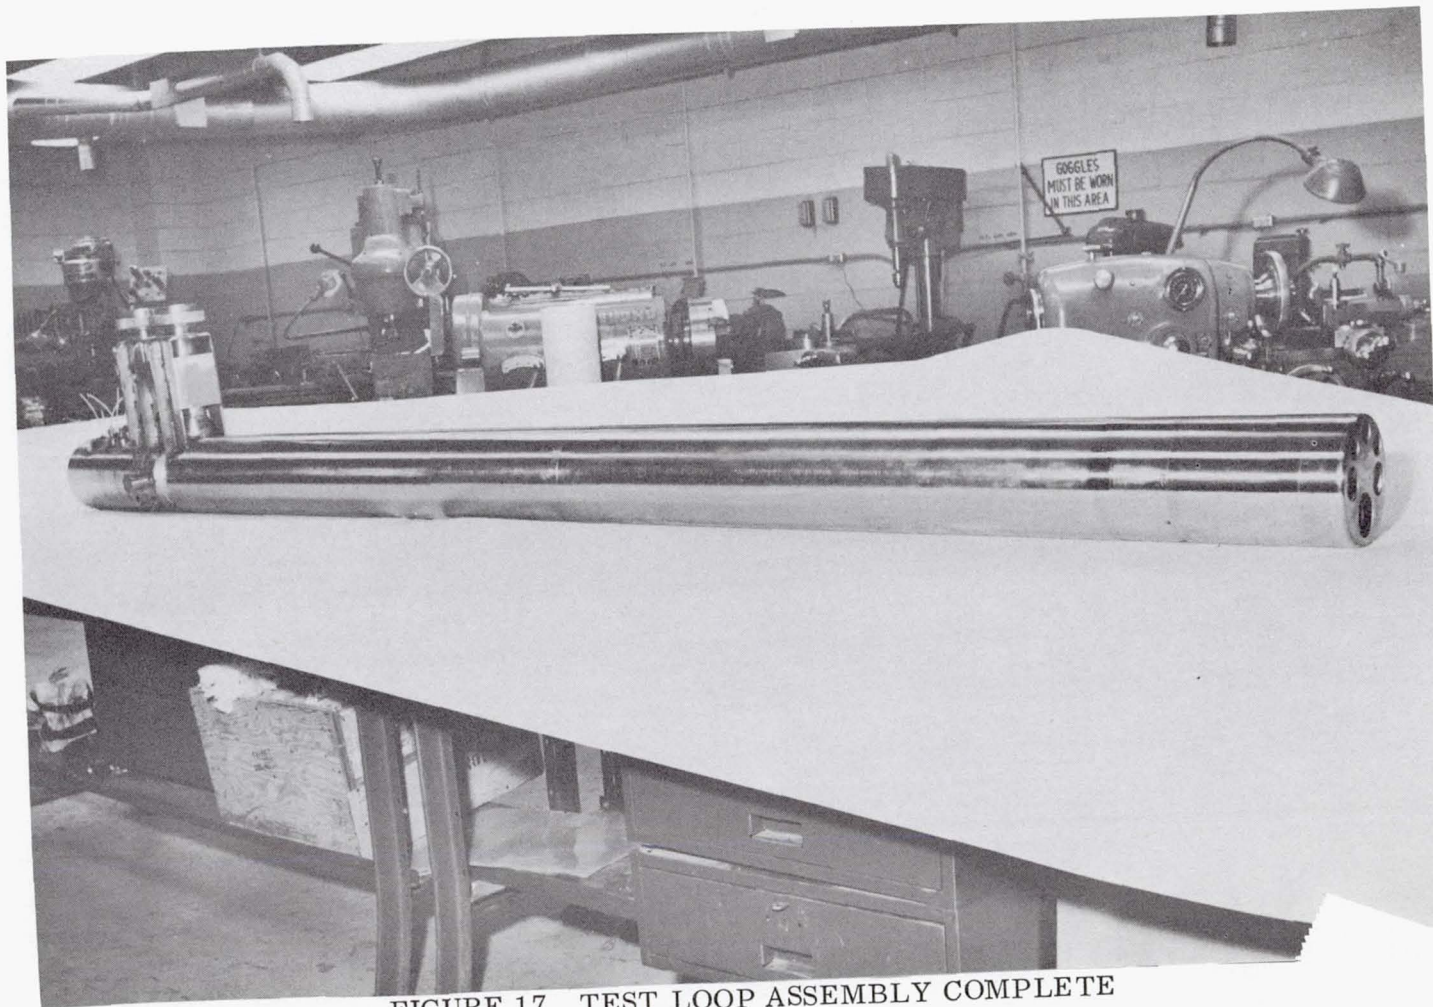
TEST LOOP ASSEMBLY COMPLETE
